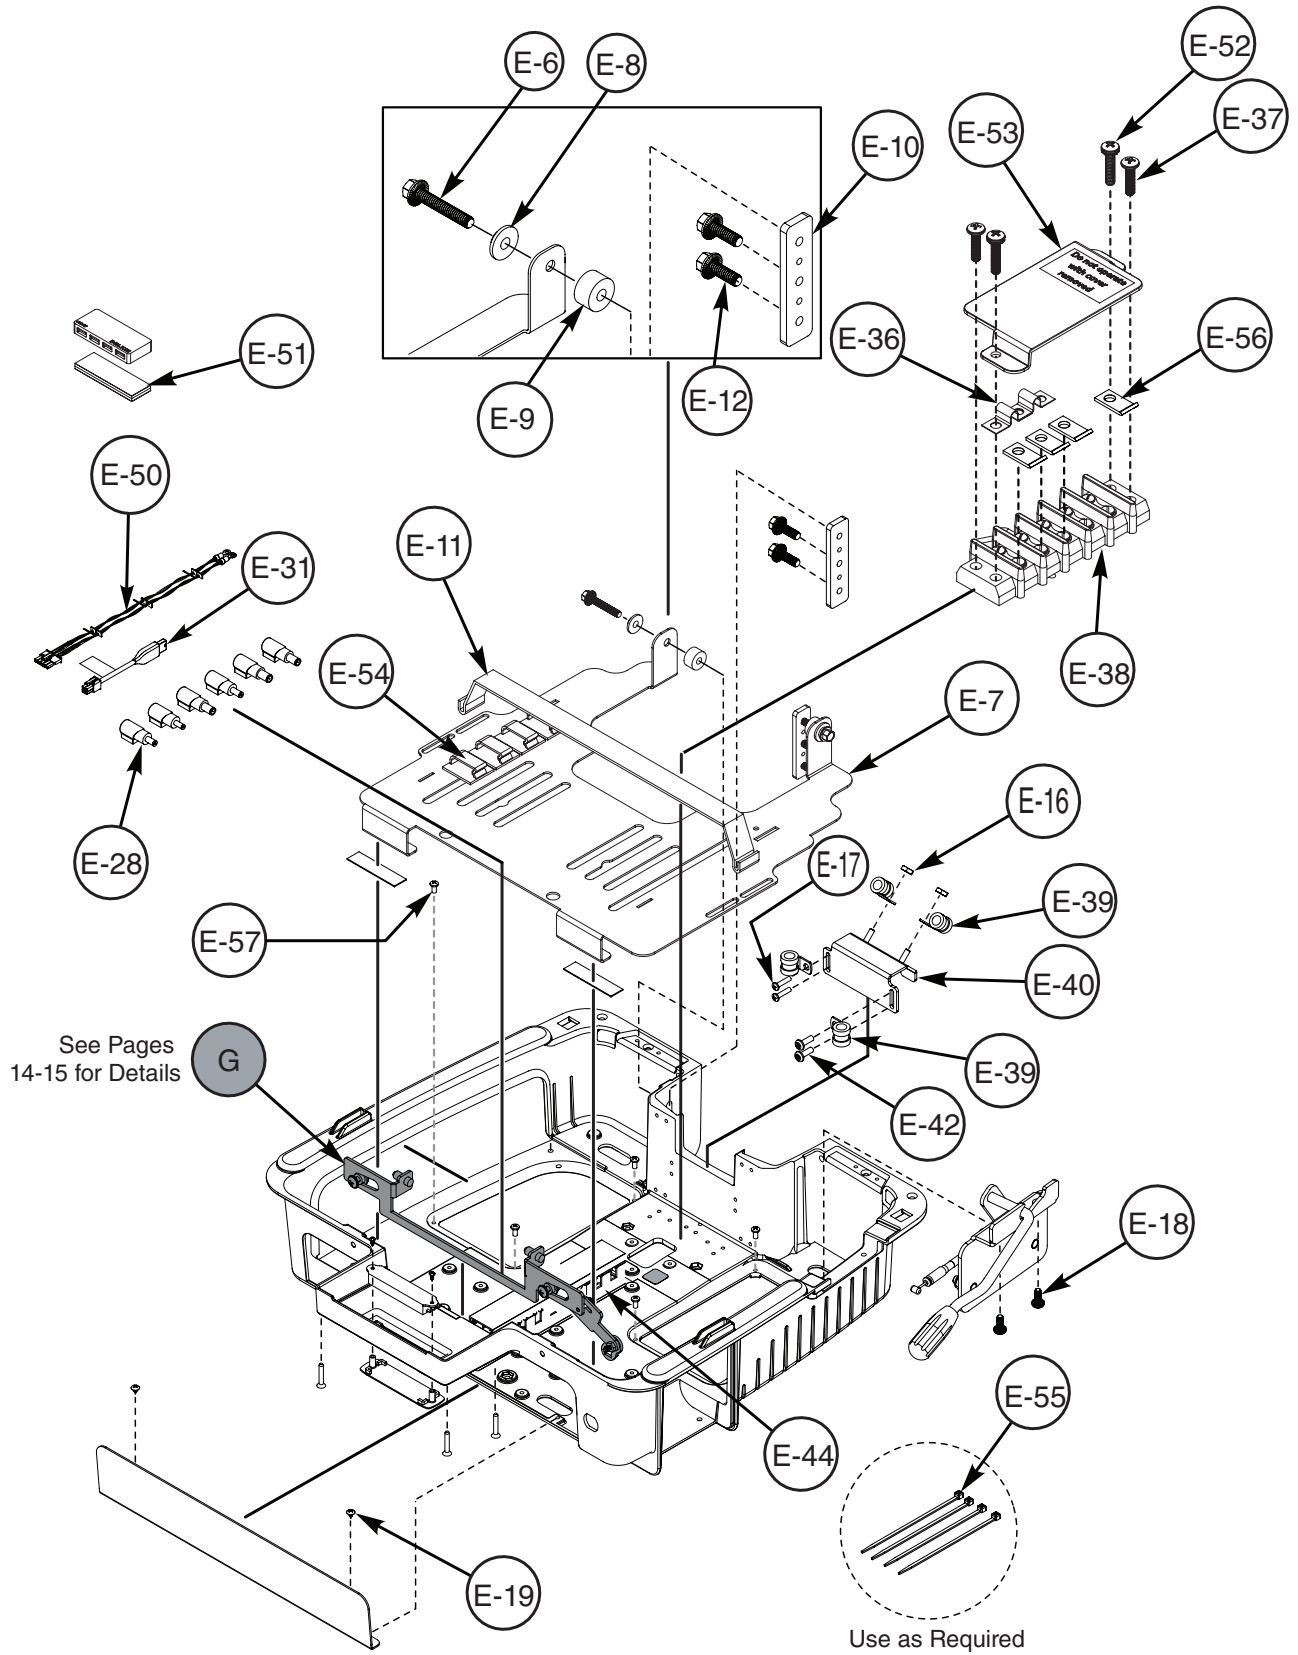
FIGURE E: WIRING TRAY ASSEMBLY - INTERIOR
